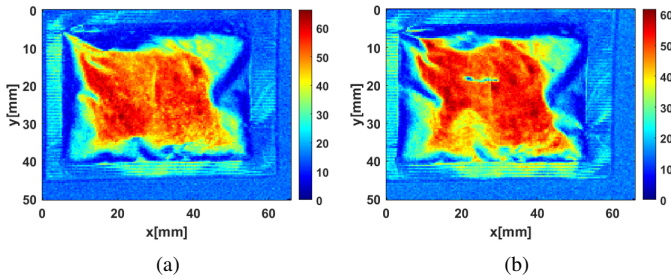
False color THz image (a) Standard packaging; (b) Defect packaging.
